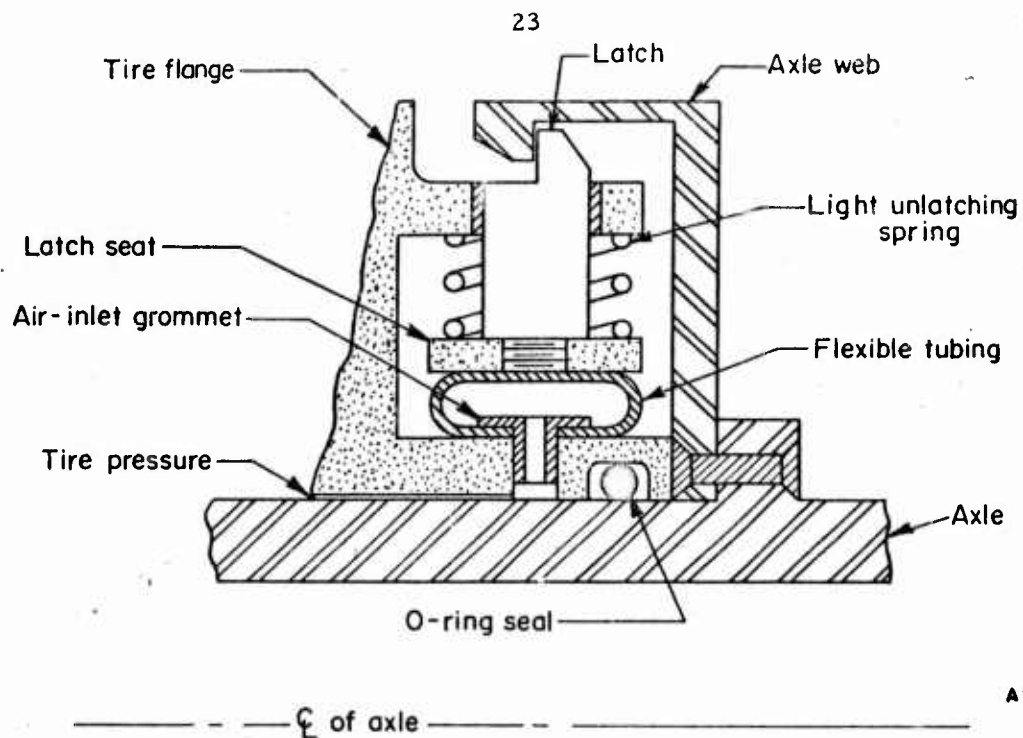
SCHEMATIC DRAWING OF TIRE-FLANGE LOCKING MECHANISM
